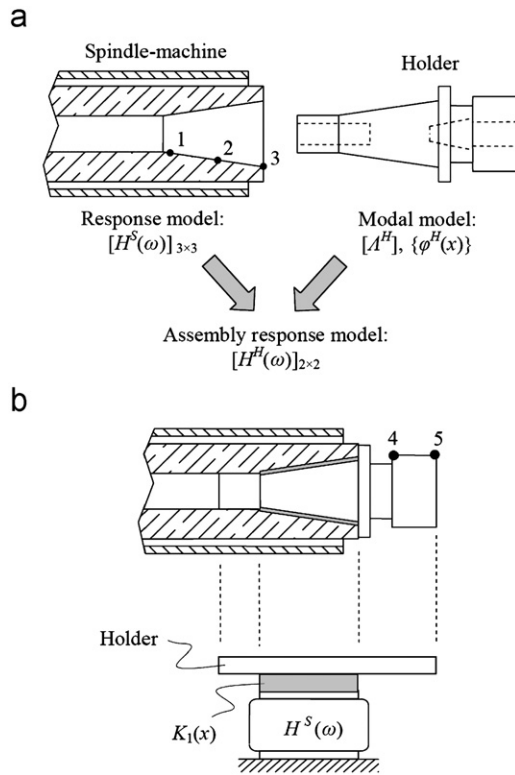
The machine spindle and holder (a) and their assembled representative model (b)
